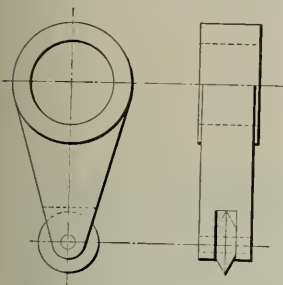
"Squeezing" Tool for Graduating in the Milling Machine.
